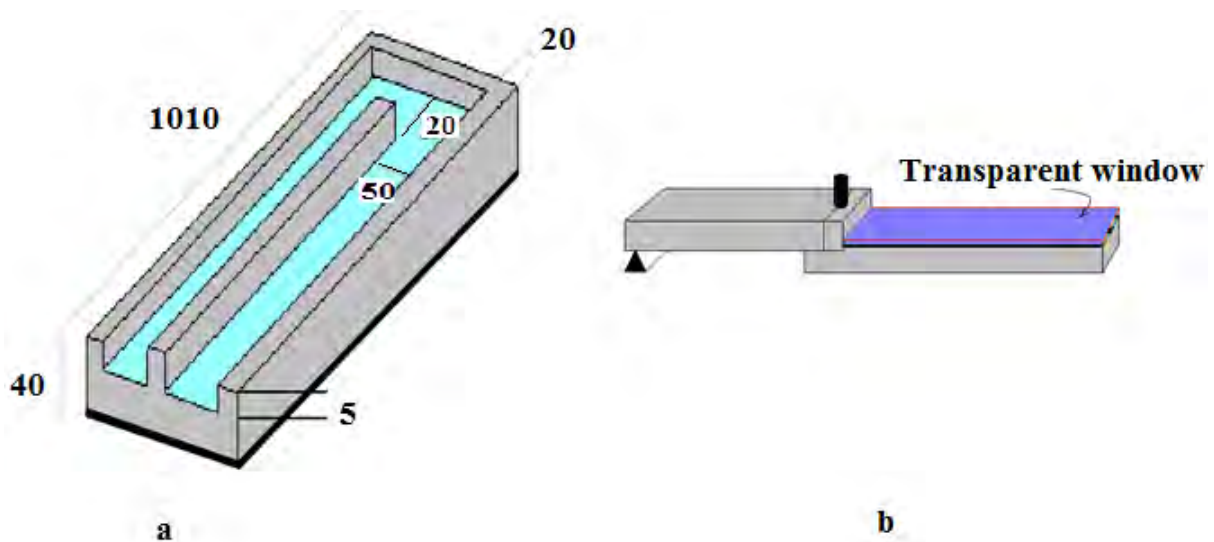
The die mould placed with a transparent window on top of the mould, shown schematically; a) the bottom level of the mould, b) the mould set up.
